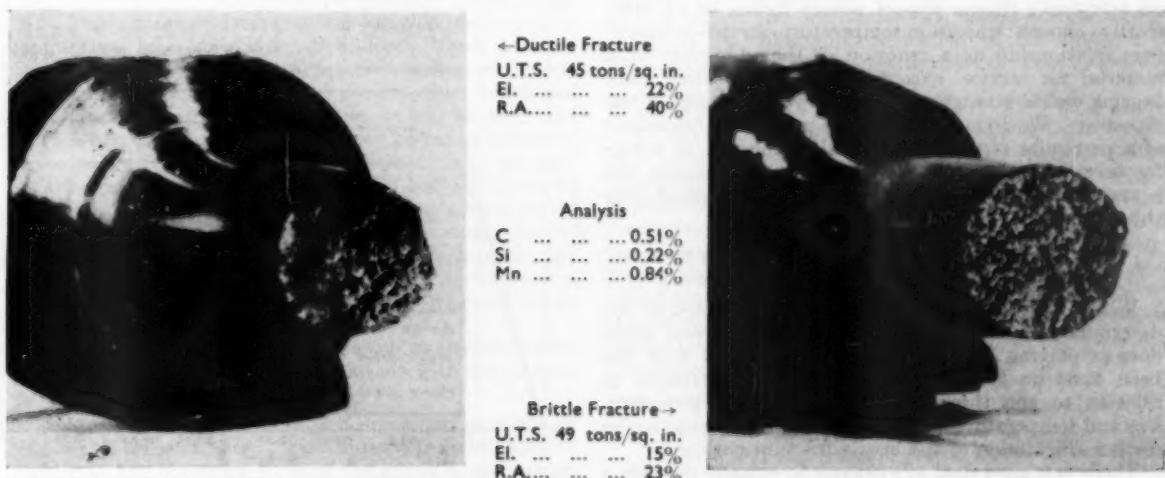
Ductile and brittle tensile fractures of medium carbon steel
